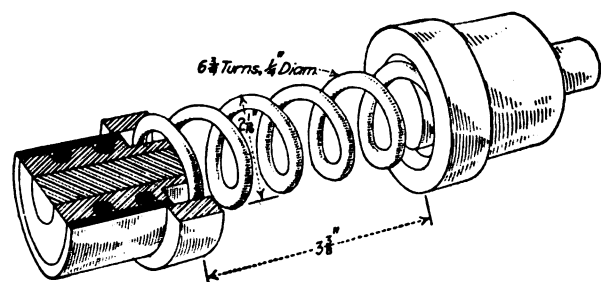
DETAILS OF THE HELICAL SPRING AND HOLDING FLANGES
